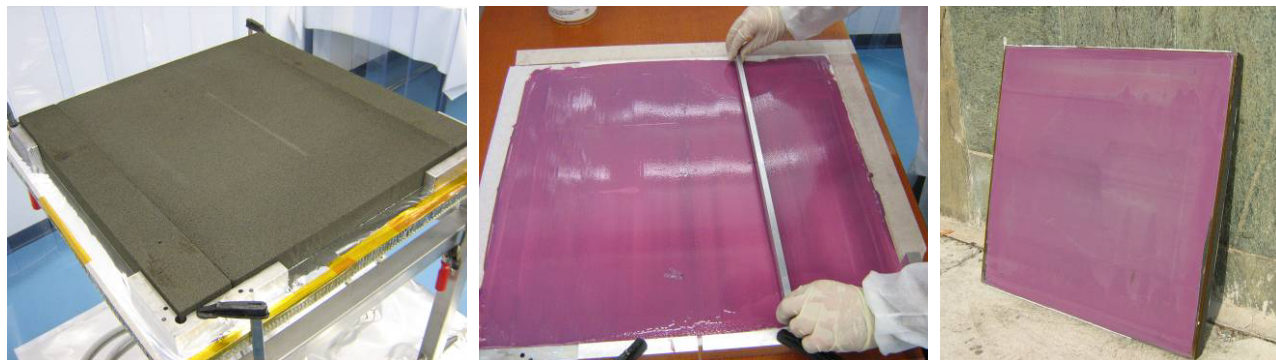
Some steps of the manufacturing of the 600x600 mm mirror panel prototype. Foamglas® boards assembly, glue spread onto the glass sheet and the panel after the vacuum release.
